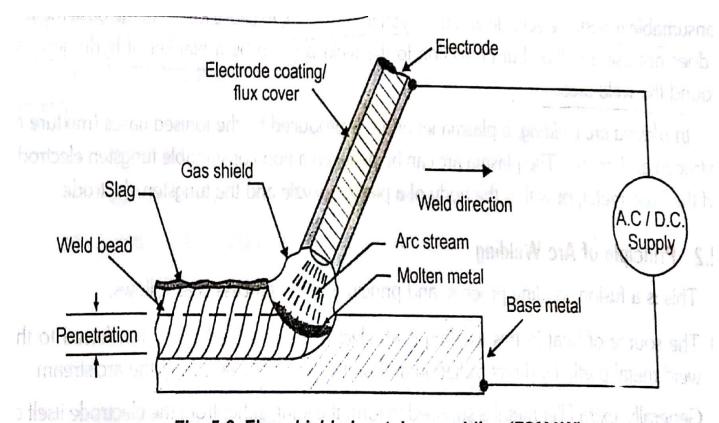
Flux shielded metal arc welding (FSMAW)
